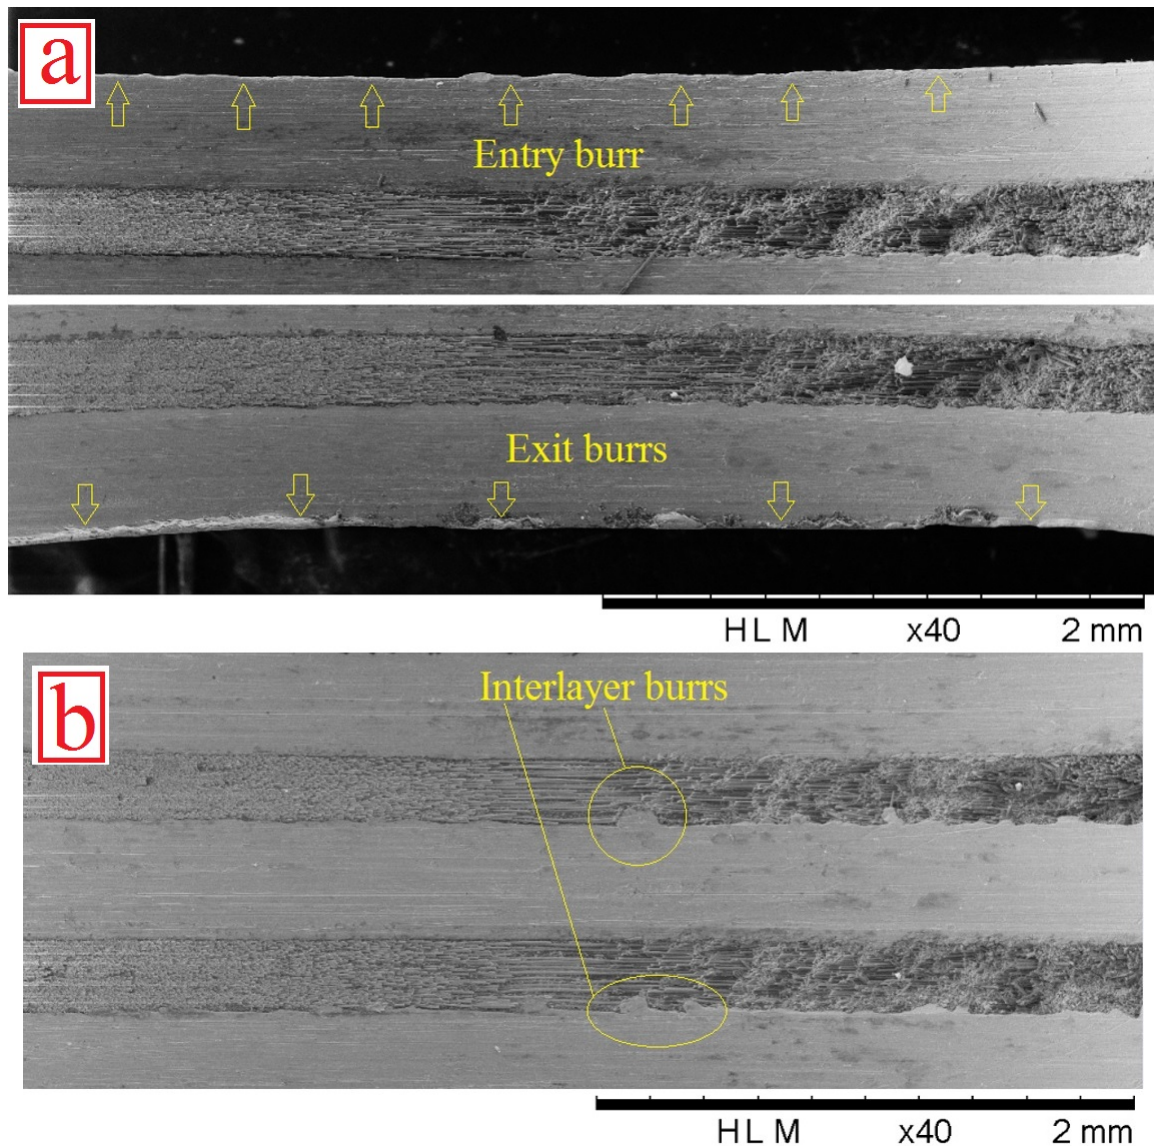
SEM image showing (a) burr formation for hole drilled at 9000 rpm, 900 mm/min, 60 mL/hr and 1 bar (b) interlayer burrs for hole drilled at 9000 rpm, 900 mm/min, 20 mL/hr and 1 bar
